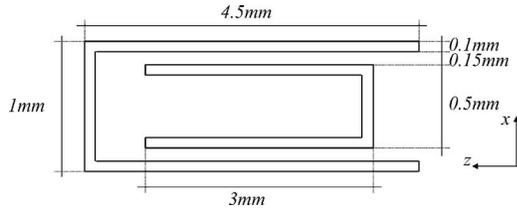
Cross section of a FDR made from adhesive copper tape with dimensions.
